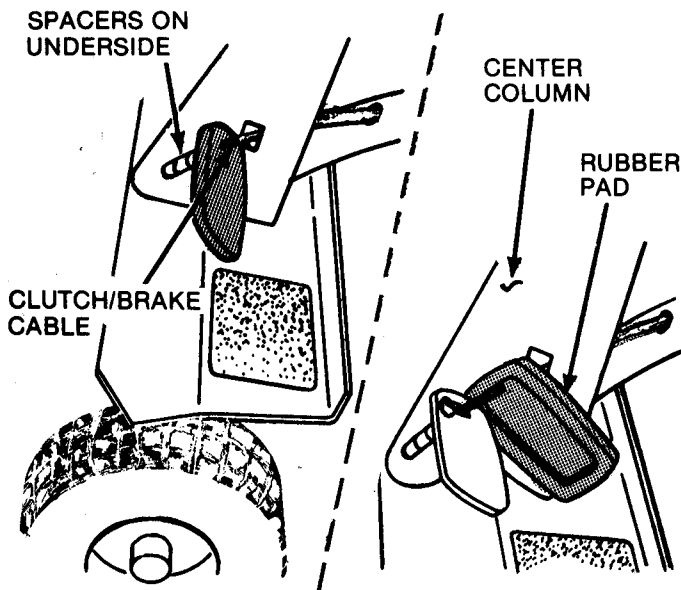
CLUTCH/BRAKE ADJUSTMENT
